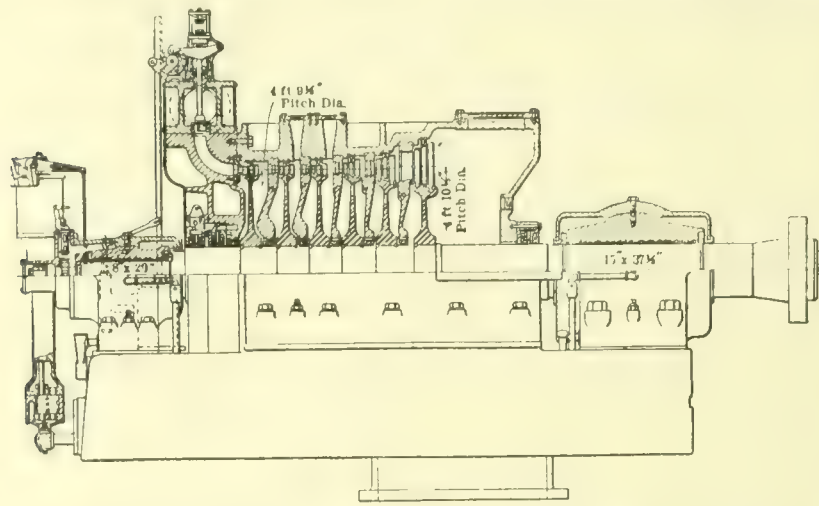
HORIZONTAL CURTIS STEAM TURBINE, 7,000 KW., 1,800 R.P.M., SIX-STAGE.
